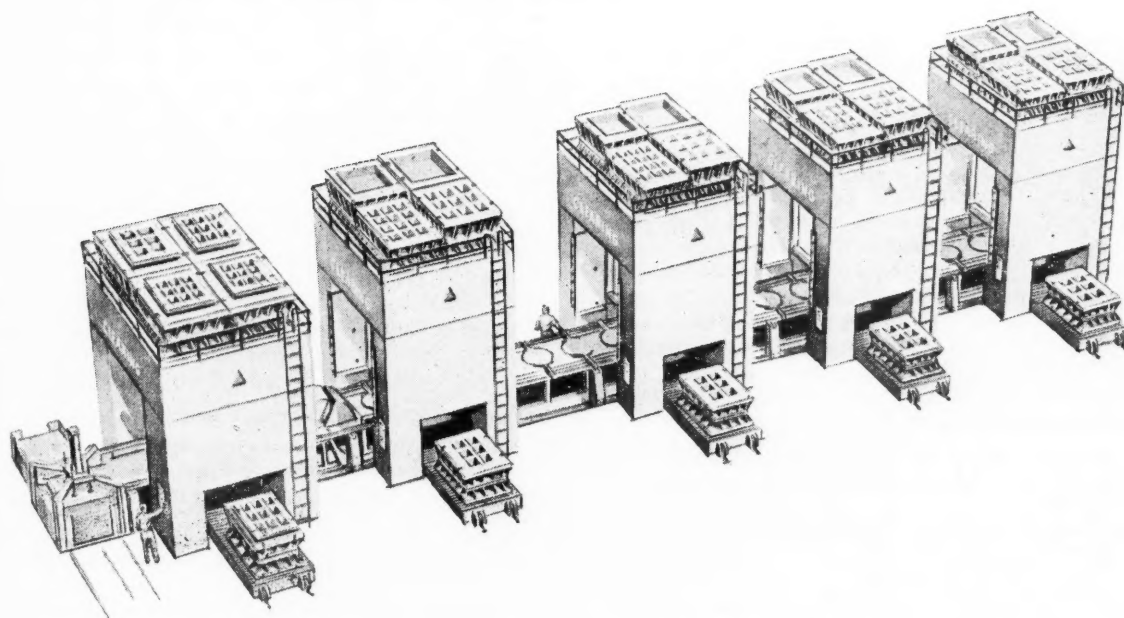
Automated bottom drive press line equipped with moving bolsters.
